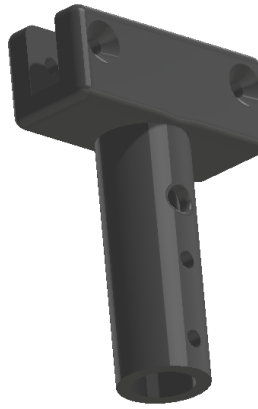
Sample fixture used to connect acrylic plate to steel rod.
